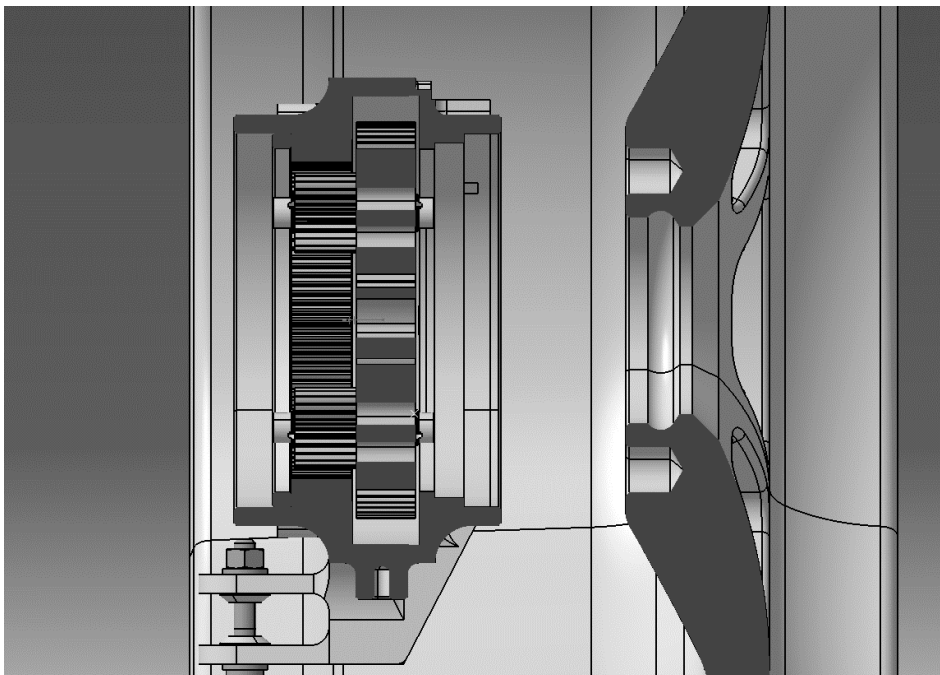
Side view of space available for a stepped planetary gear train within the existing layout.
